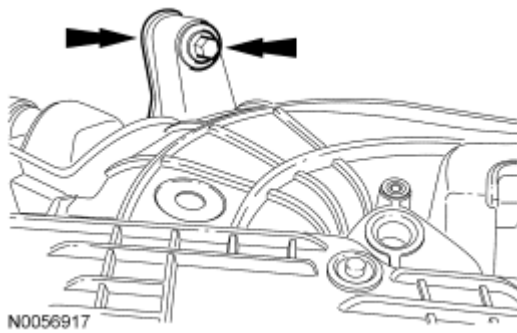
Identifying Upper Intake Manifold Support Bracket & Bolts
